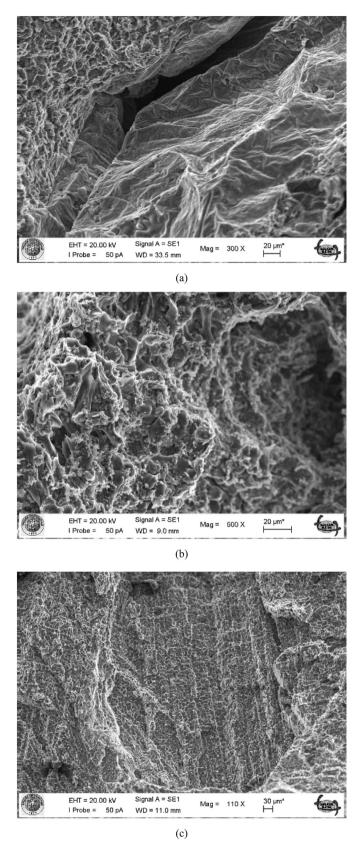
Features on hot tear surfaces of (a) non-degassed castings with large old bifilms, (b) Sr-modified castings showing small intermetallic-like particles, and (c) degassed castings with no Sr addition.
